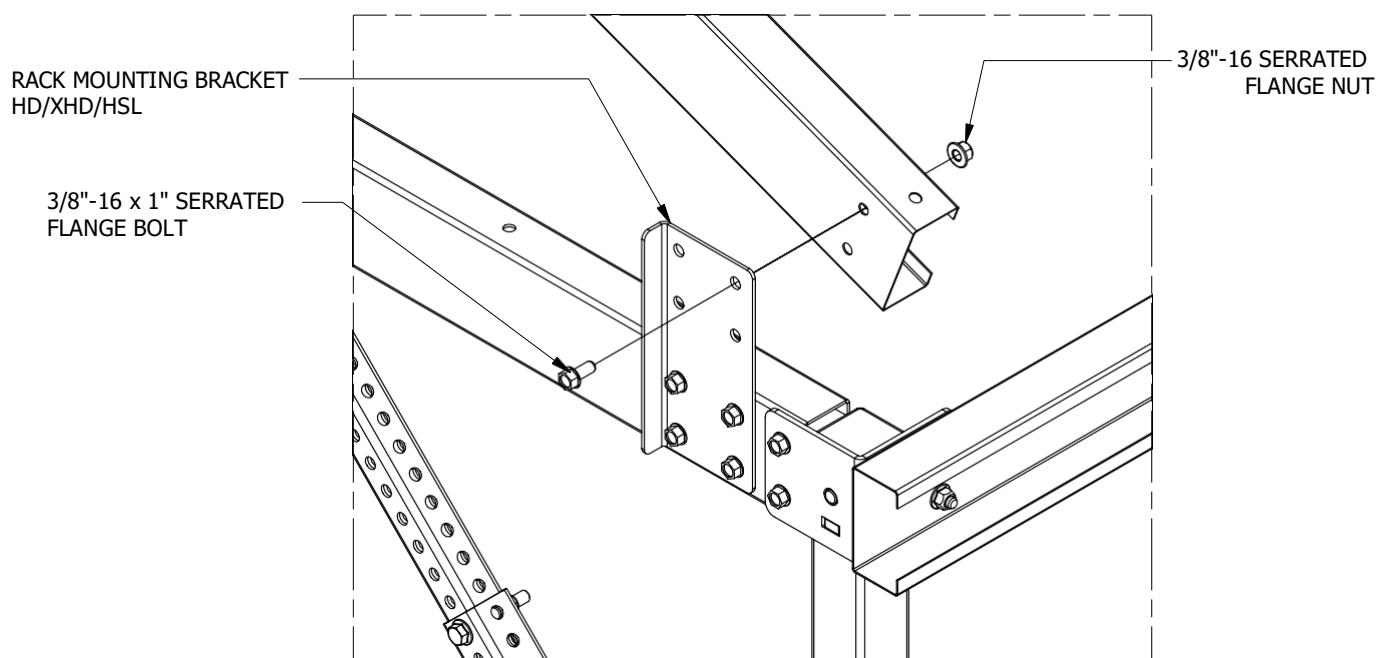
Strong Back to Rack Mounting Bracket - HD/XHD/HSL
